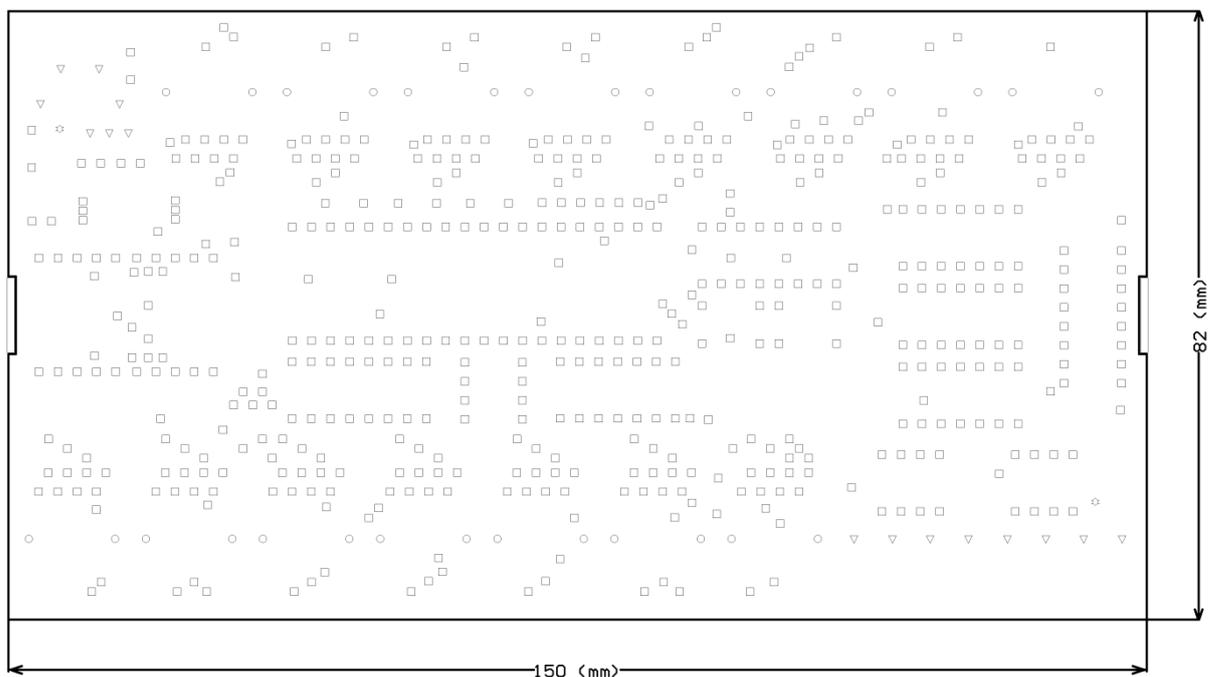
CONTROL BOARD'S DRILL DRAWING LAYER.
